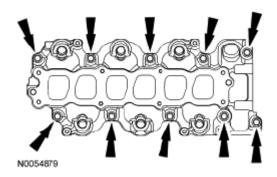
Locating Lower Intake Manifold Bolts Courtesy of FORD MOTOR CO.
